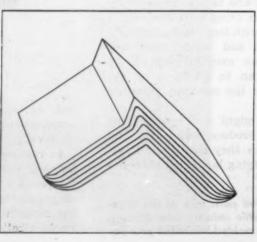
Left—This moldedlaminated auto distributor part is produced of uniformly shaped laminae which are bunched in the mold at the junction of the two legs to produce the thickness required
